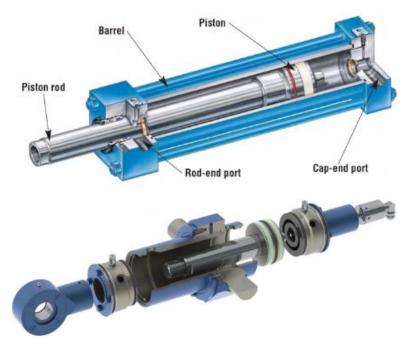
Section View of Hydraulic Actuator and Its Parts (Source: Gomis-Bellmunt, O. et al¹¹)
